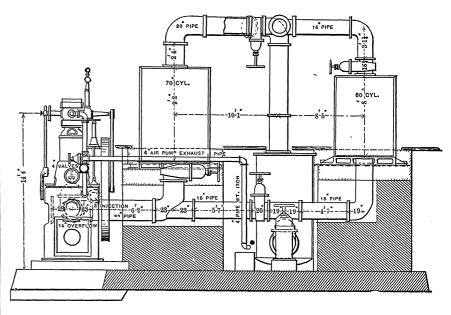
Cross Sectional Elevation through Cylinders, Receivers and Air Pump.
